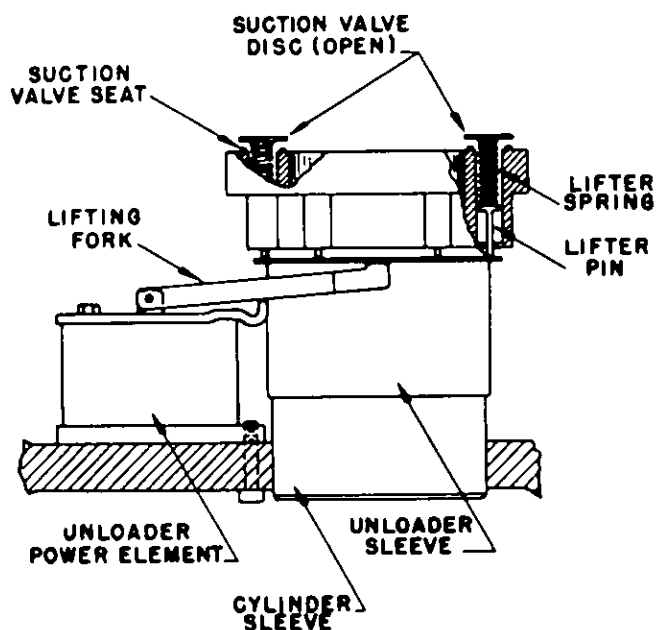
SUCTION VALVE LIFTING MECHANISM
